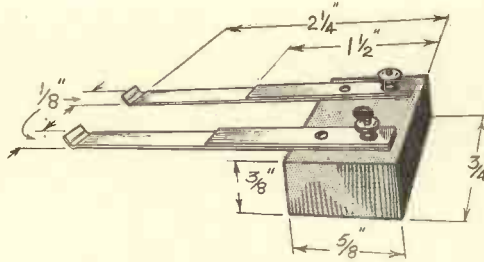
DETAILS OF THE BRUSH GEAR.
